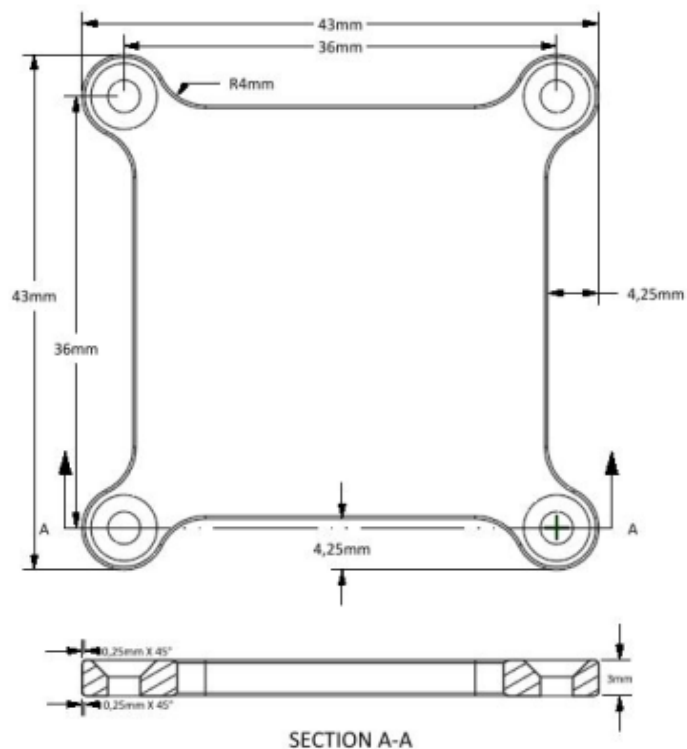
OSM Size S (Heat Spreader Plate, Mechanical Dimensions)
